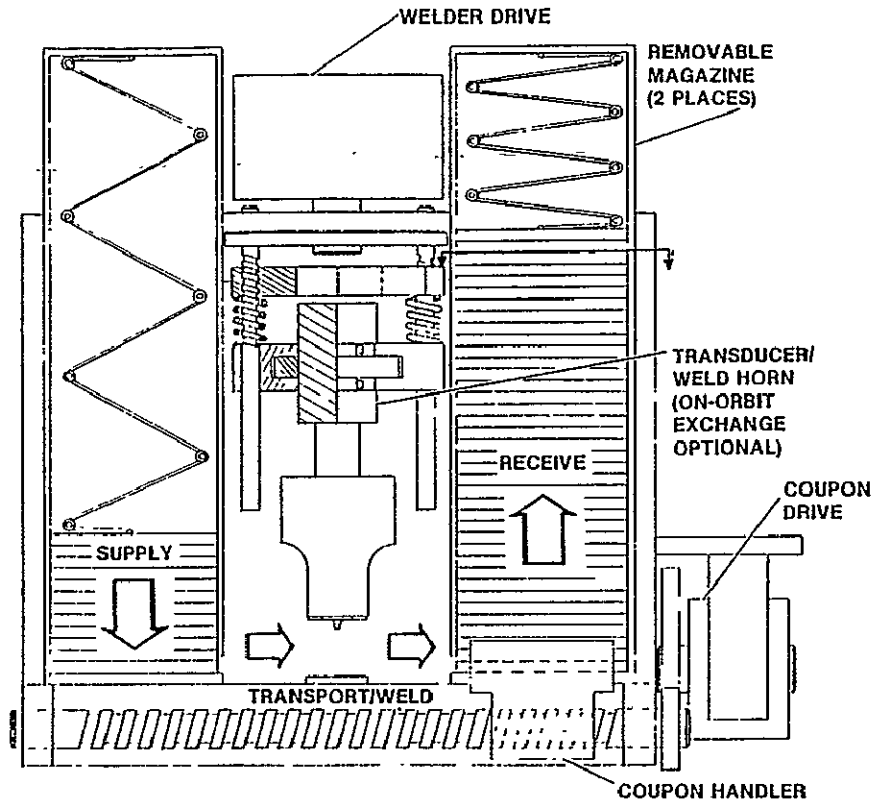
Ultrasonic welding experiment concept.
